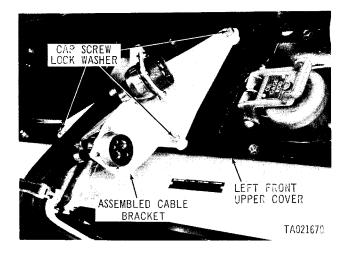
Removing or installing left wiring harness cable bracket, model AVDS-1790-2C and AVDS-1790-2D early engines.
